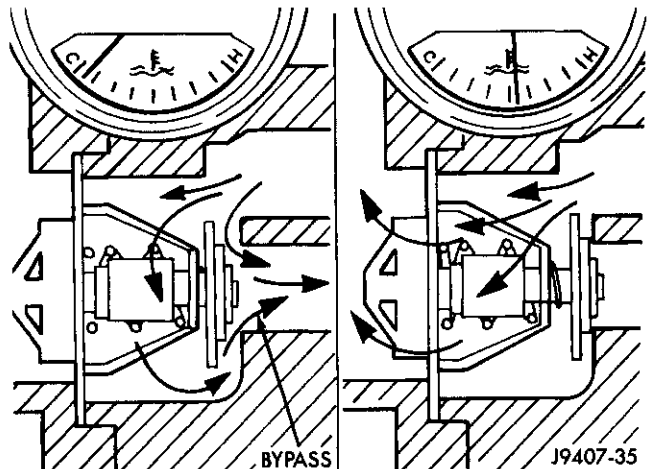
Thermostat Operation—5.9L Diesel—Typical
